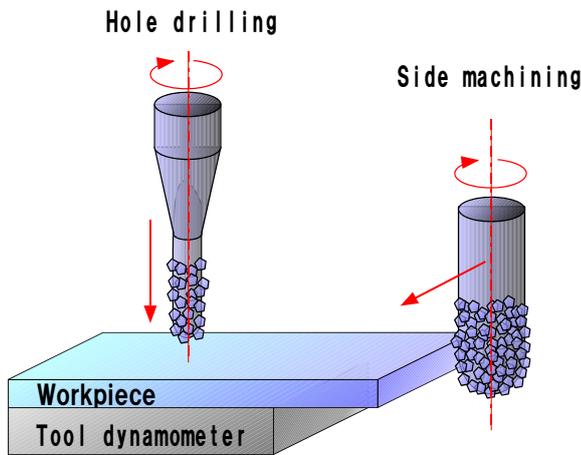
Schematic illustration of side machining and hole drilling for testing tool life.
